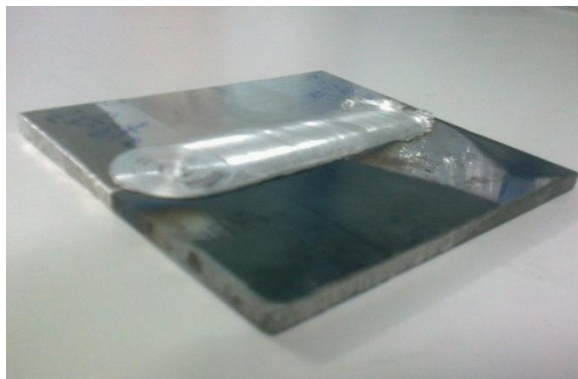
Friction stir butt welded sample of Al 6082 alloy (white colour) and Mild steel (black colour)
